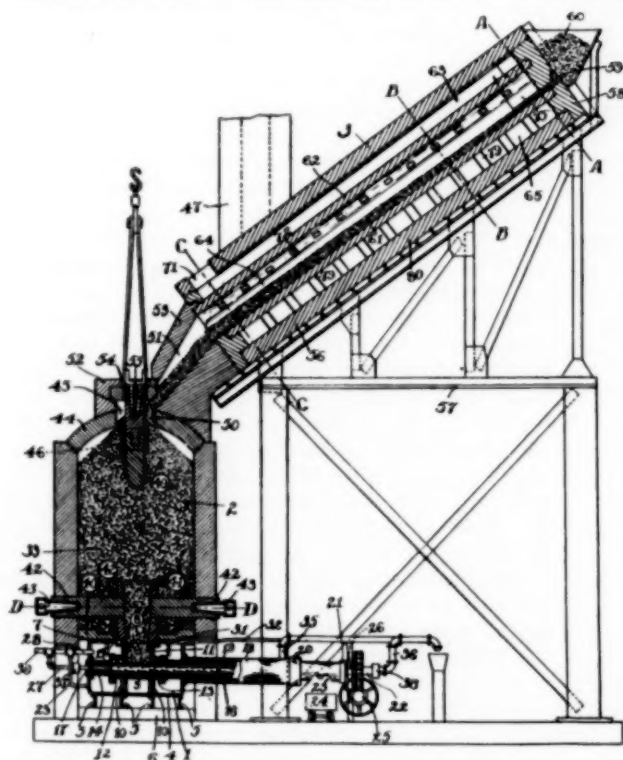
CROSS-SECTION OF CALCINING FURNACE
